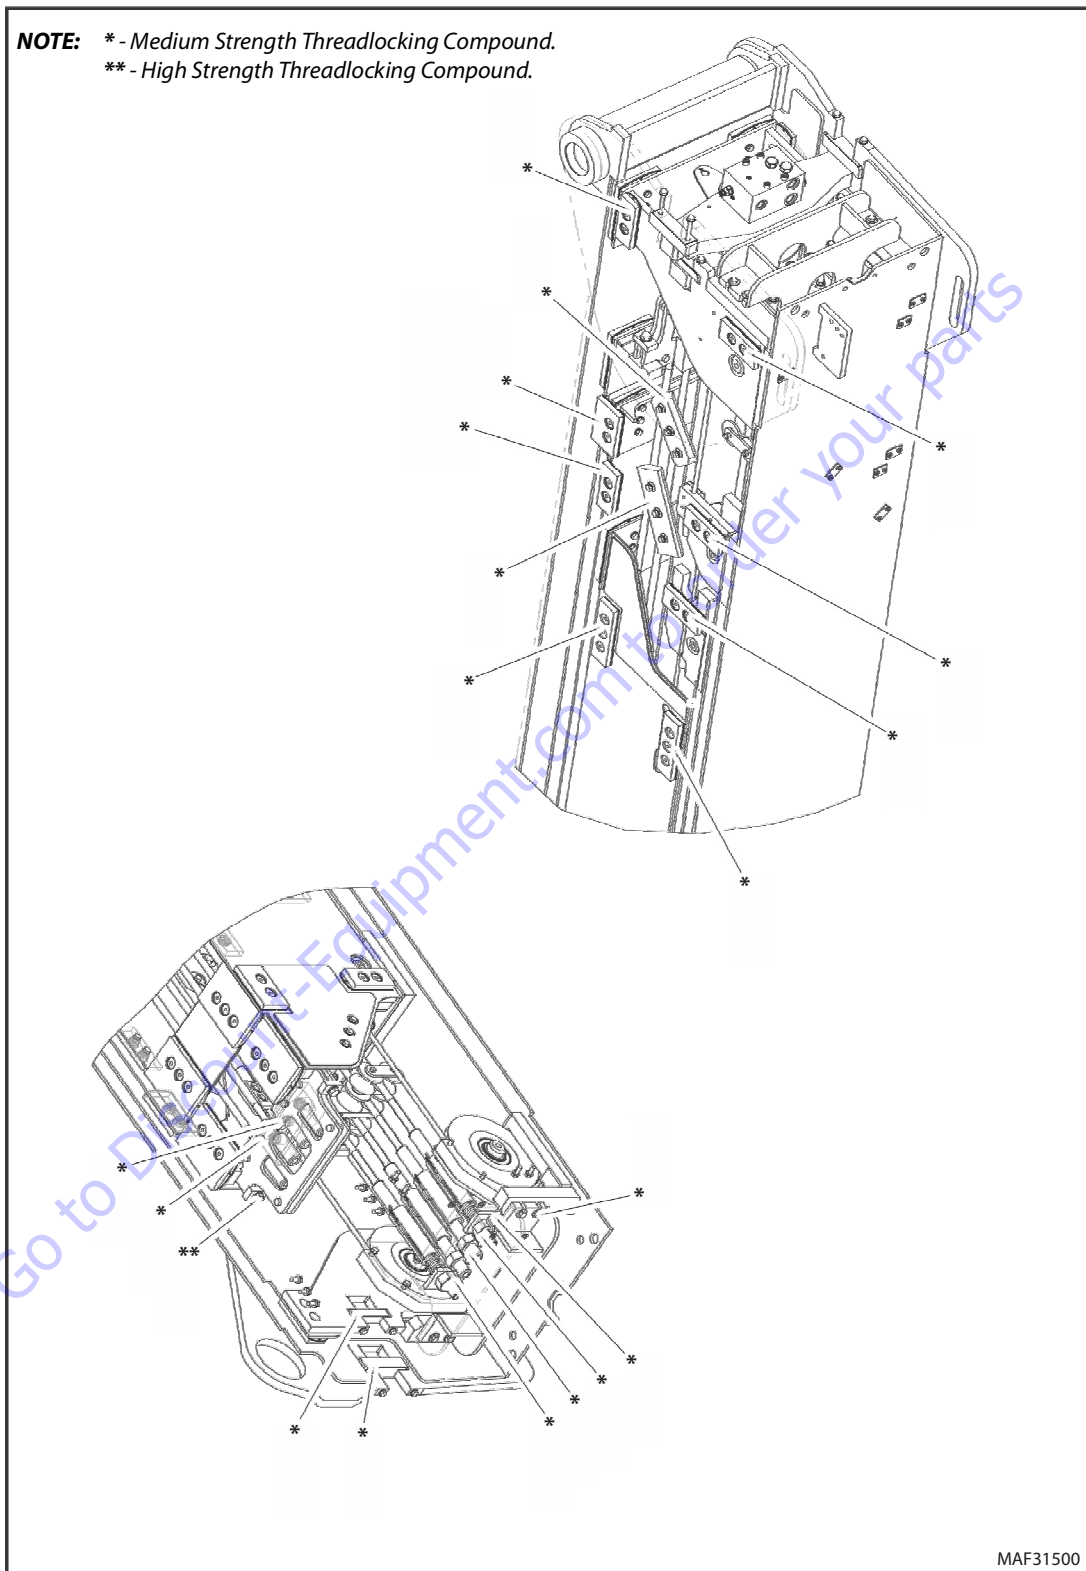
Locations for Threadlocker Application - Sheet 2 of 5
